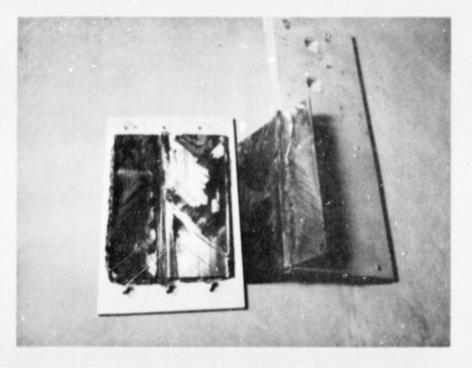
Failure Mode of Cap to Web Shear Test, 180
